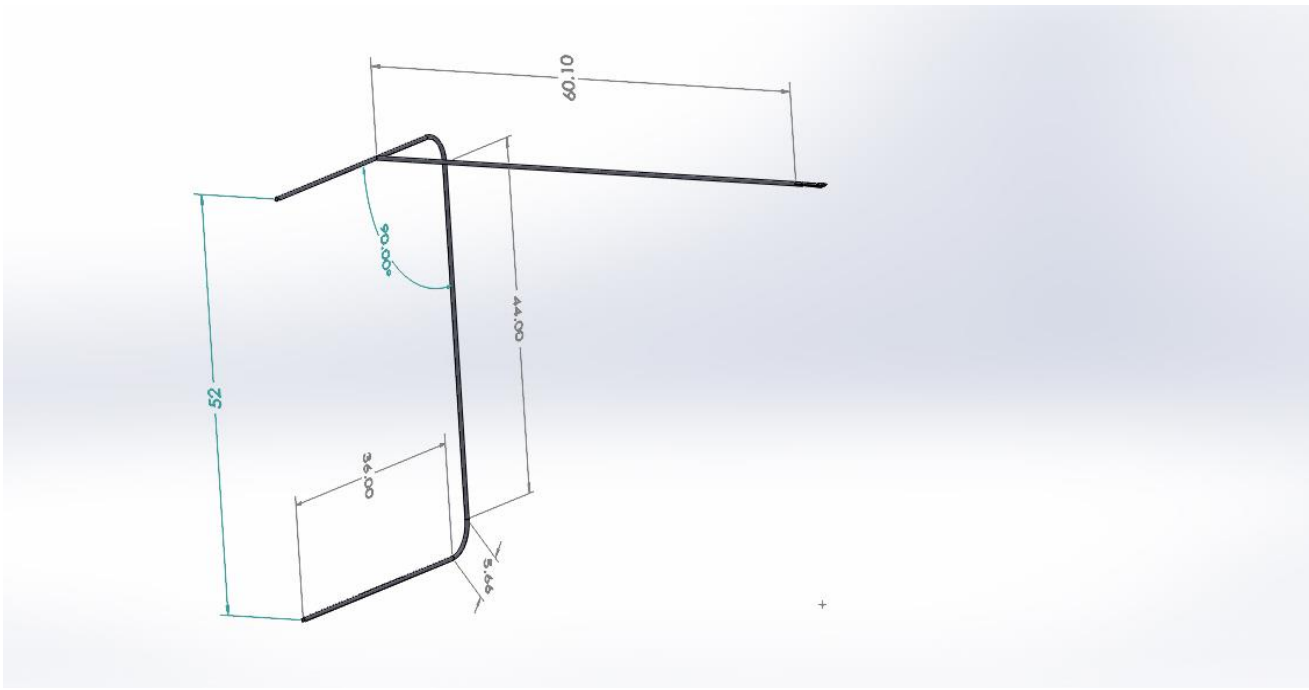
Sail Frame with welded arm (3d view) (all dimensions are in inch)
